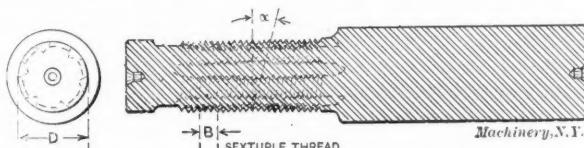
Hob used for Cutting Concave Knurls in the Milling Machine
